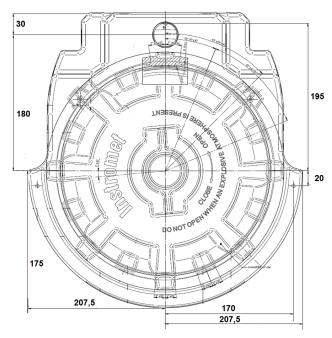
Plan view with dimensions (without couplings and connections)
